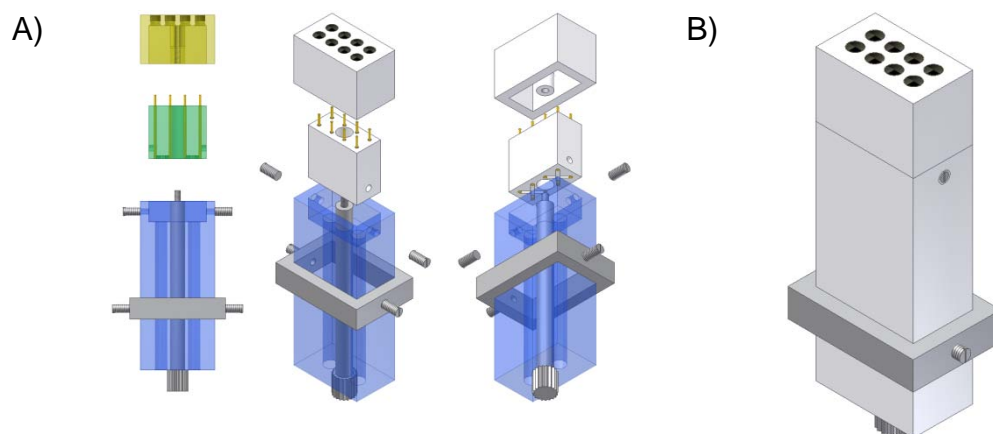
Drawings of the MWE shaft assembly including the MWE tip
